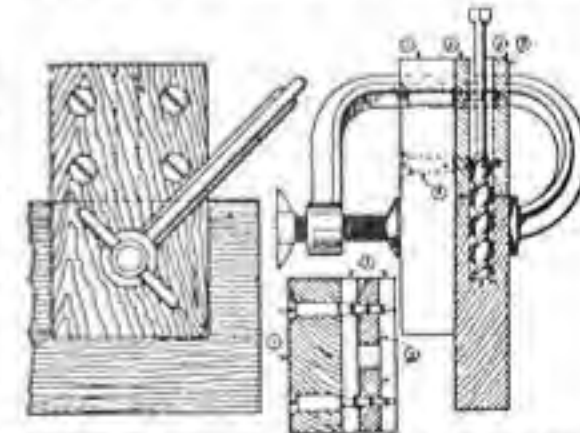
Constructional view of a boring gage, which is useful when making holes for dowels or boring for mortises.
